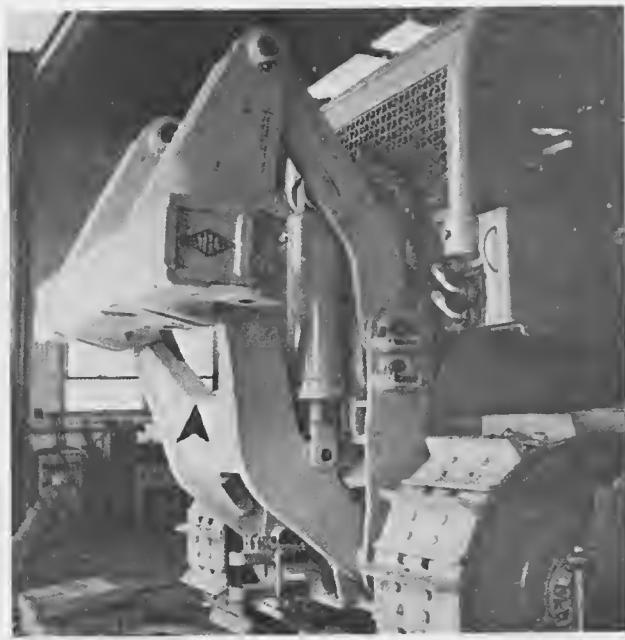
Draft Frame with Reinforcing Strap Installed
